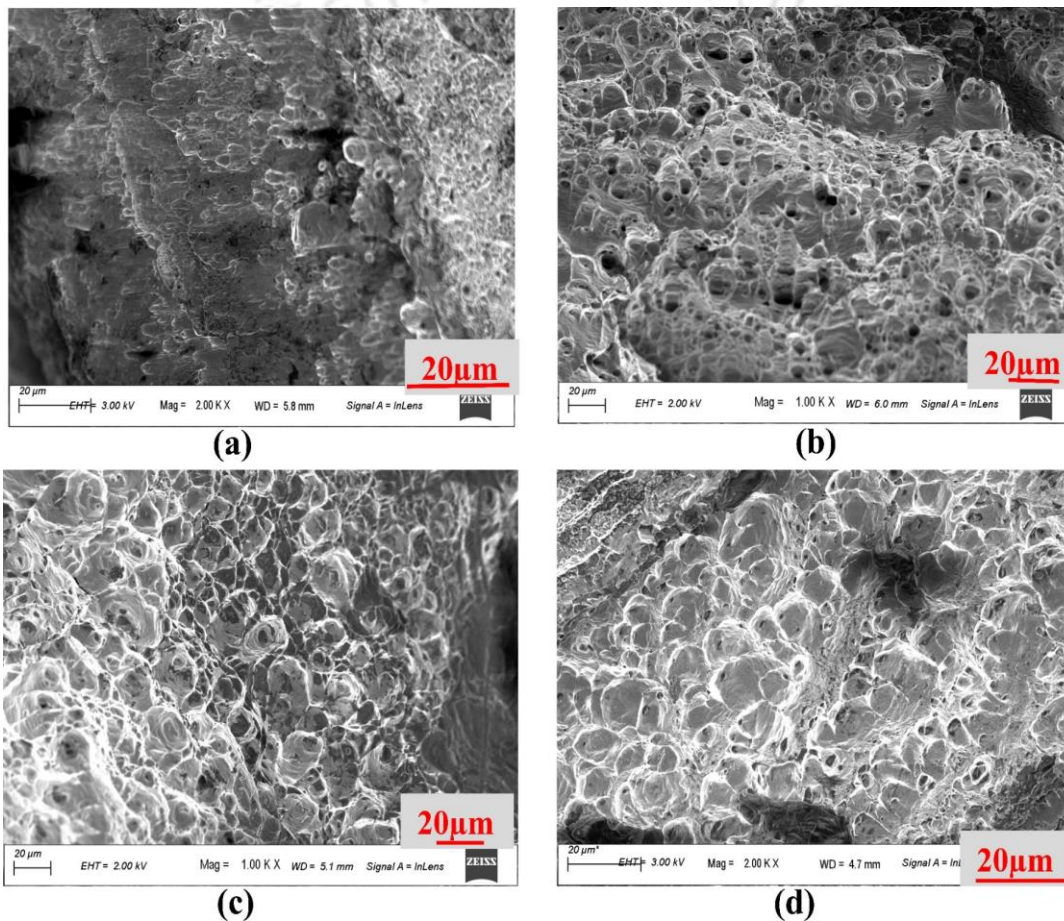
SEM images of the fracture surface of the peel test specimen (a) FSSW (b) FSSW_AB
